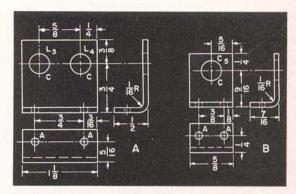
Detail drawings for fabricating the angle brackets used to mount the following components in the 144-megacycle exciter: "A"-coils L3 and L5; and "B"-capacitor C5. Holes on the main chassis should be marked for location from these brackets.
